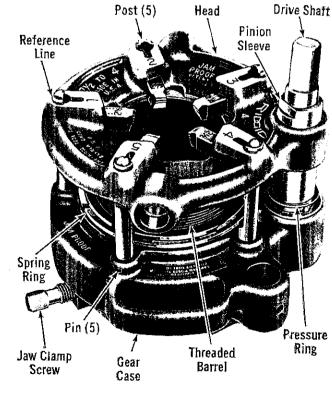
No. 4PJ Geared Threader with Drive Shaft Up.
